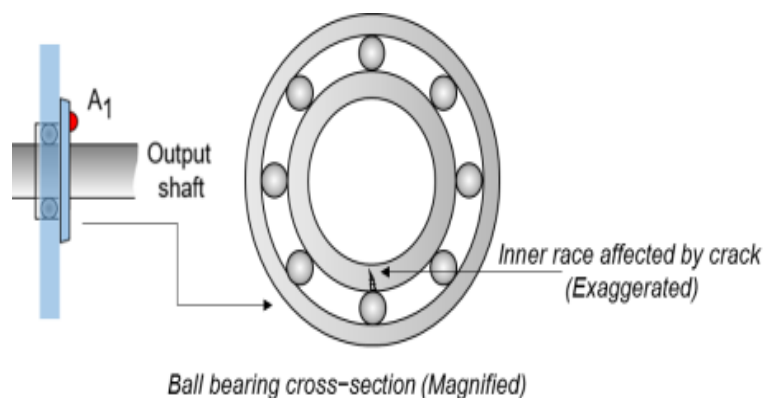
Ball Bearing Cross Section with crack on Inner Race
